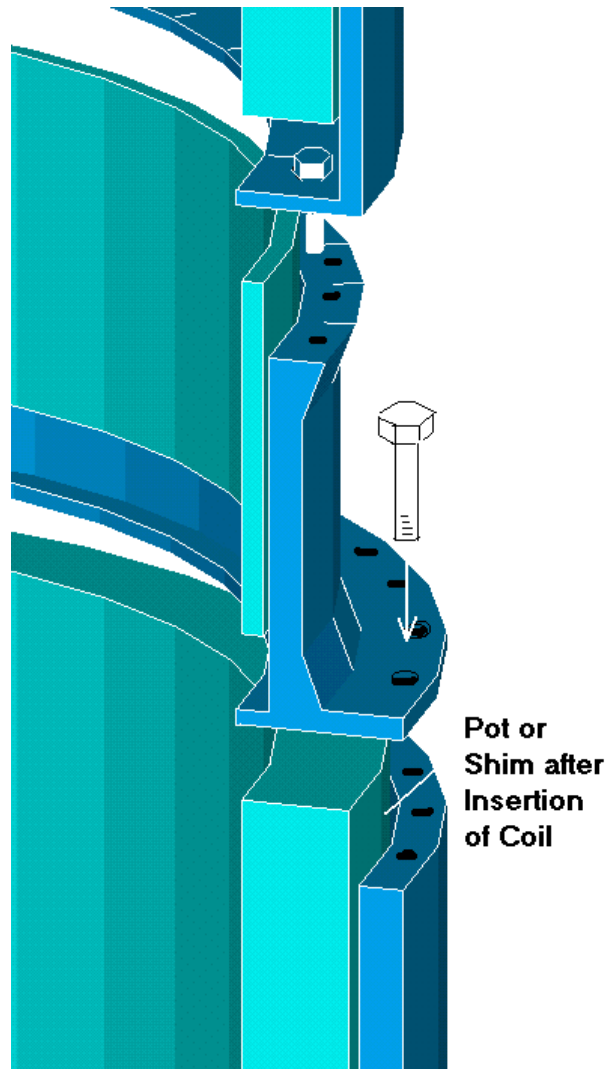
Bolted mandrel assembly detail. Waffle cooling channels and helium vent grooves are not shown.
